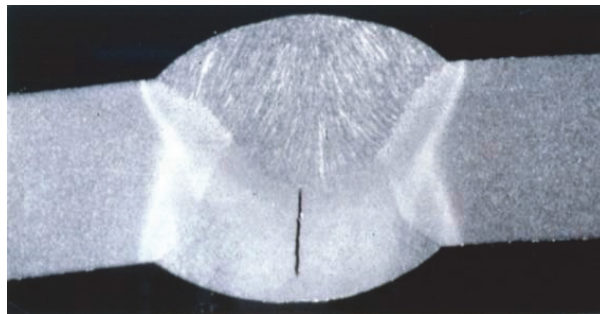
Weld Metal Crack (Hot Crack)
